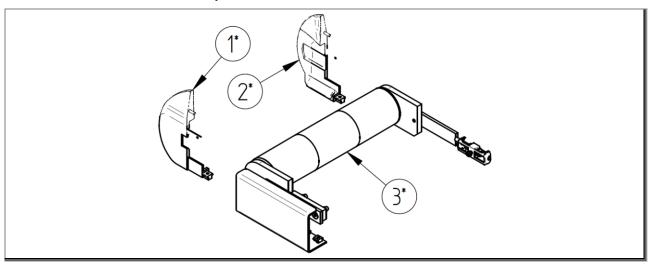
Parts list: Drum motor - position of drive unit 14 - ZZ.900.0151.00
